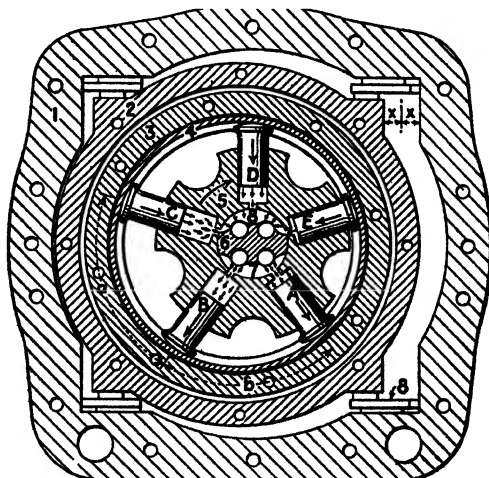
Explanatory diagram of plunger pump shown in Fig. 15-7: (1) casing; (2) adjustable slide block; (3) rotor; (4) reaction ring; (5) cylinder barrel; (6) pintle; (7) intake port; (8) pressure port. A, B, C, D, and E are plungers. The reaction ring (4) both pushes and pulls the plungers. (*The Oilgear Company*)
